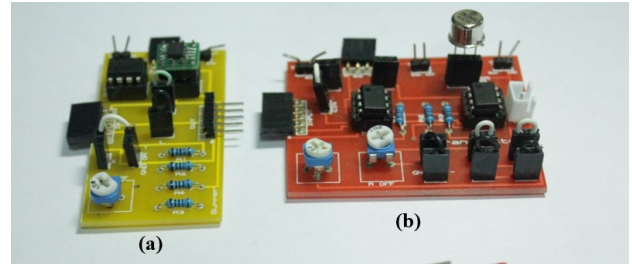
A Photograph of LED driver module: (a) the Tx-B module with specific dimension 33.32mm x 62.56mm; (b) the Tx-A module with specific dimension 49.96mm x 61.85mm;
